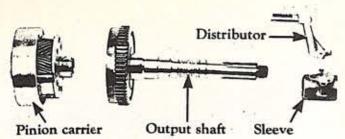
Carrier, Output Shaft, and Distributor Assemblies.
